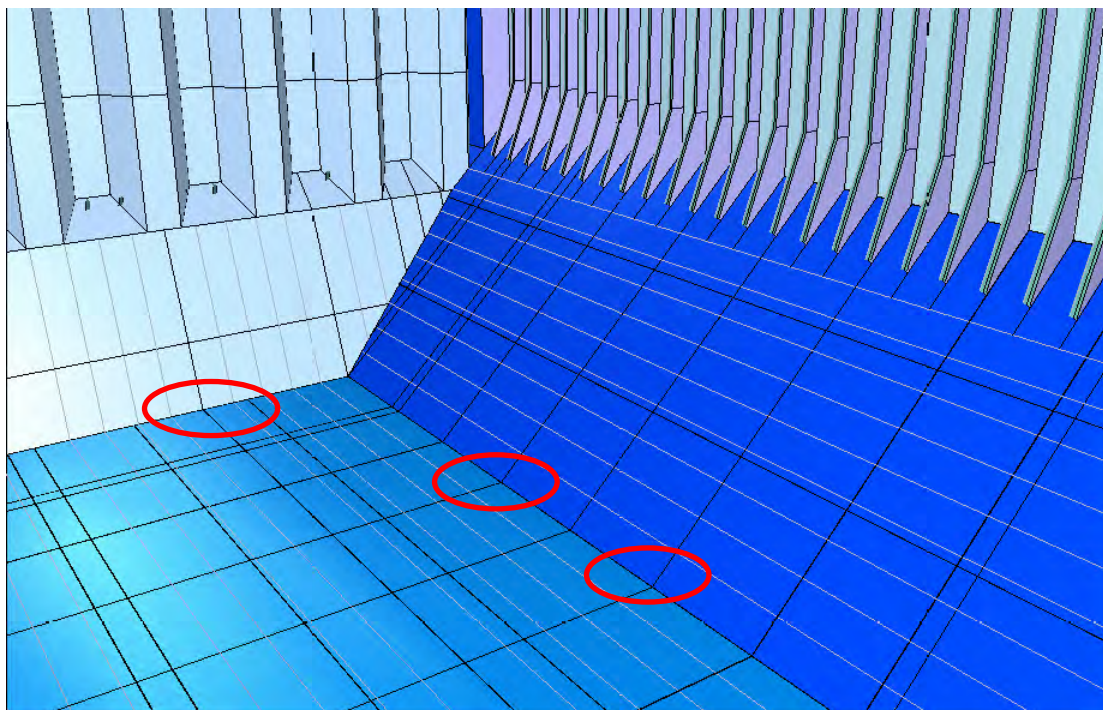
Fatigue cracks happened on the edge of the stoop plate
